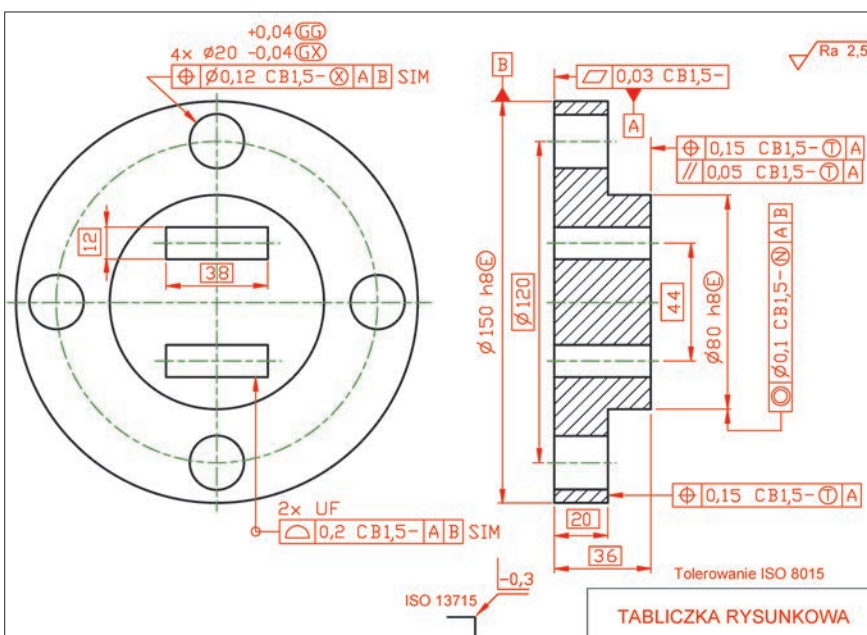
The SIM modifier adjacent to the position tolerance and surface profile tolerances indicates that two patterns of tolerance fields are combined into one single requirement. The cuboid and cylindrical holes should not be rotated relative to each other. Rys. 4. Modyfikator SIM przyległy do oznaczeń tolerancji pozycji i tolerancji profilu powierzchni wskazuje, że dwa szyki pól tolerancji są połączone w jedno pojedyncze wymaganie. Otwory prostopadłościenne i walcowe nie powinny być obrócone względem siebie
